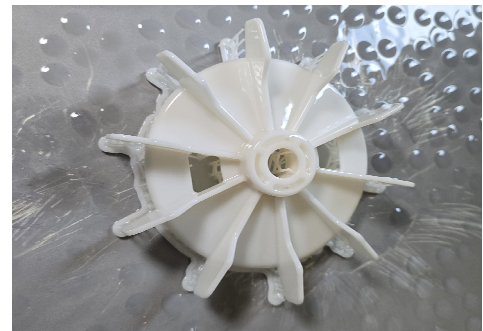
Fabricated impeller prototype using MSLA 3D printing
